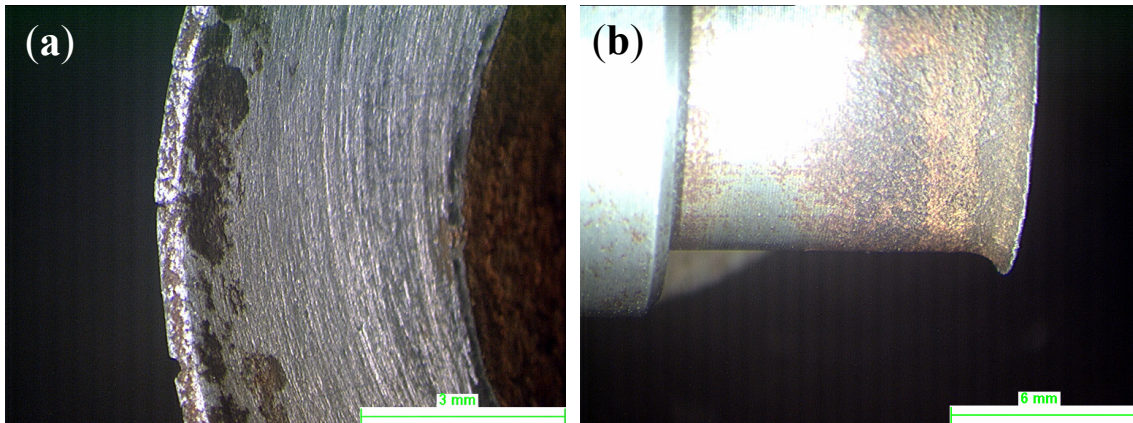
Pictures of a #2000 CIB-D Elid 1 wheel. - (a) wheel's surface stripped of Elid oxidized layer after Elid 1 superfinishing titanium, (b) burr formed on the edge of the wheel as the wheel wears.
